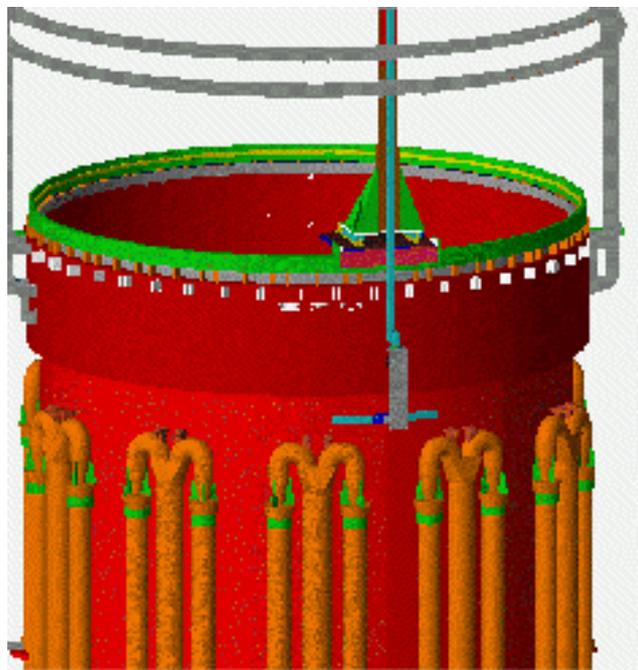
WIRES BWR core shroud inspection manipulator system.
